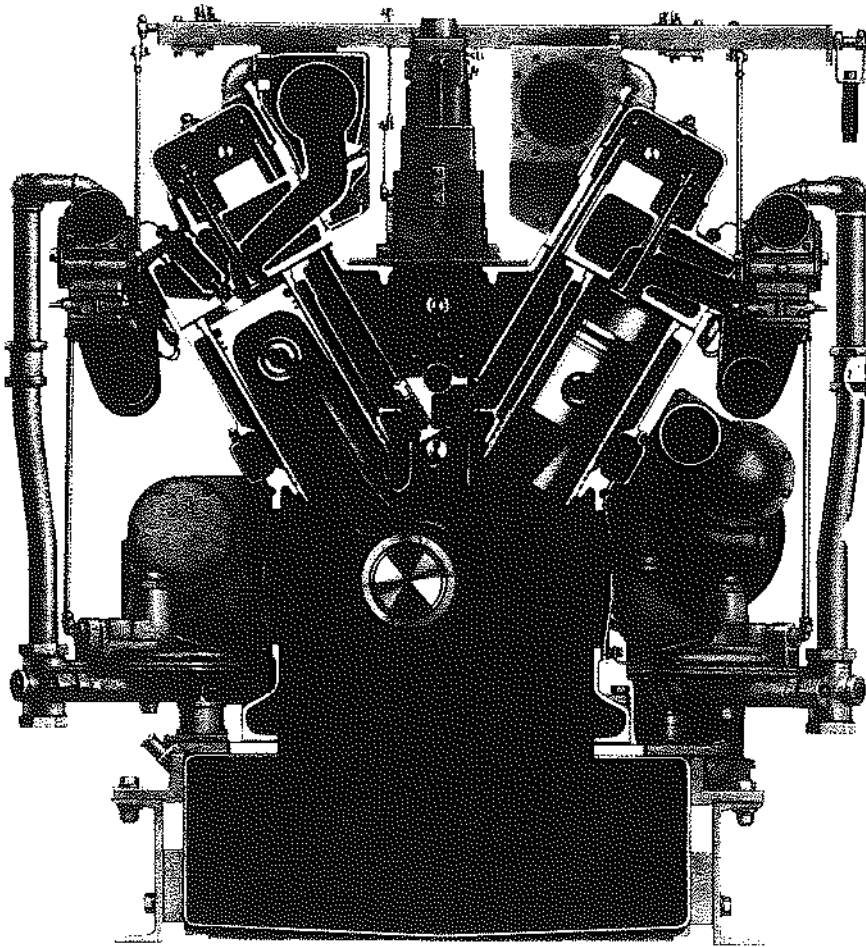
Combustion chambers and cylinder heads on spark-ignition gas engines and dual-fuel engines.
